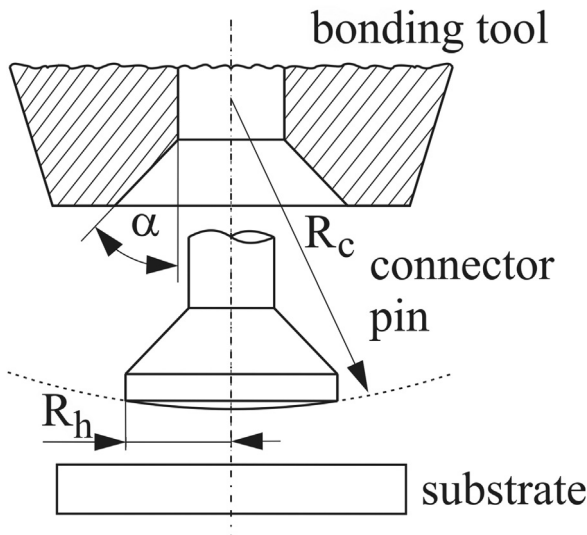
Design of the bonding tool and the connector pin with an form fit clamping mechanism between the tool and pin, [41].
